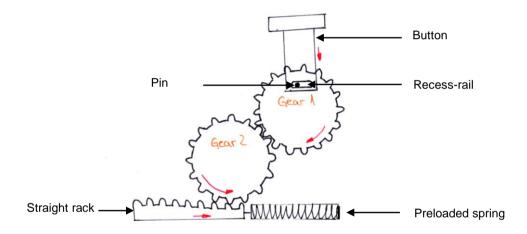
Schematic drawing of the second mechanism.
